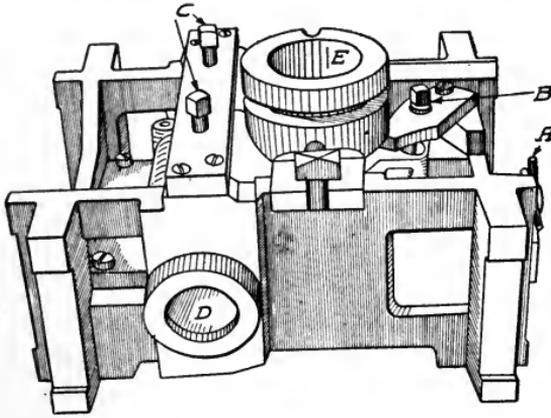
Bottom View of Box Drill Jig Shown in Fig. 375
